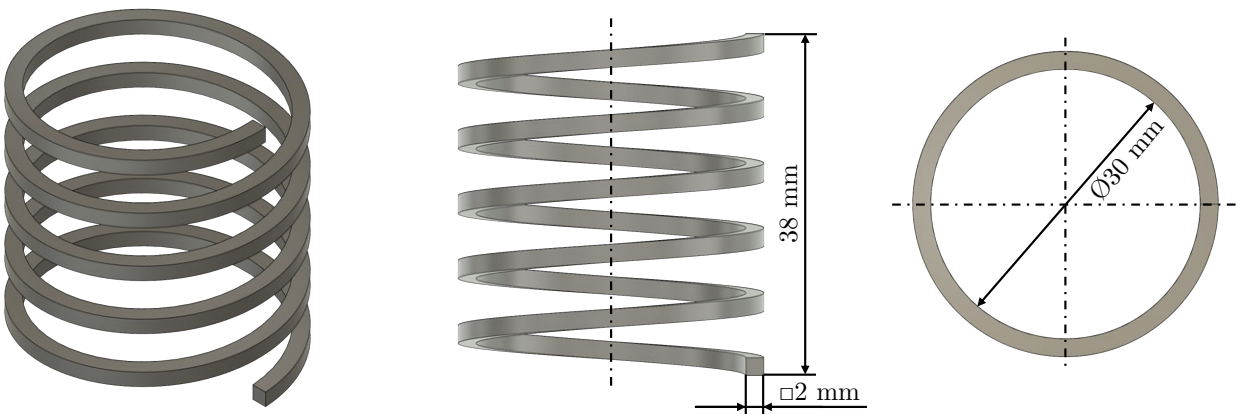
Helical spring with dimensions, part utilized for showcasing the present procedure.
